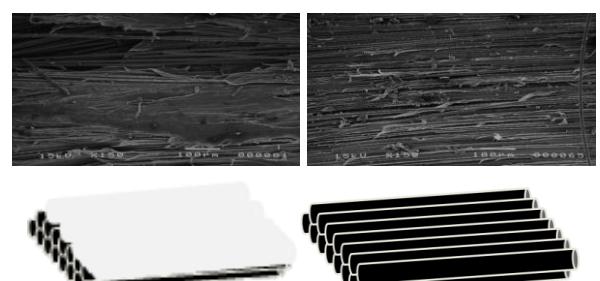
Photographs and schematics of fracture surface of welded specimen with PP-MAPP.
